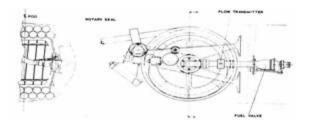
Mk 32 first hose-drum unit design, starboard side
